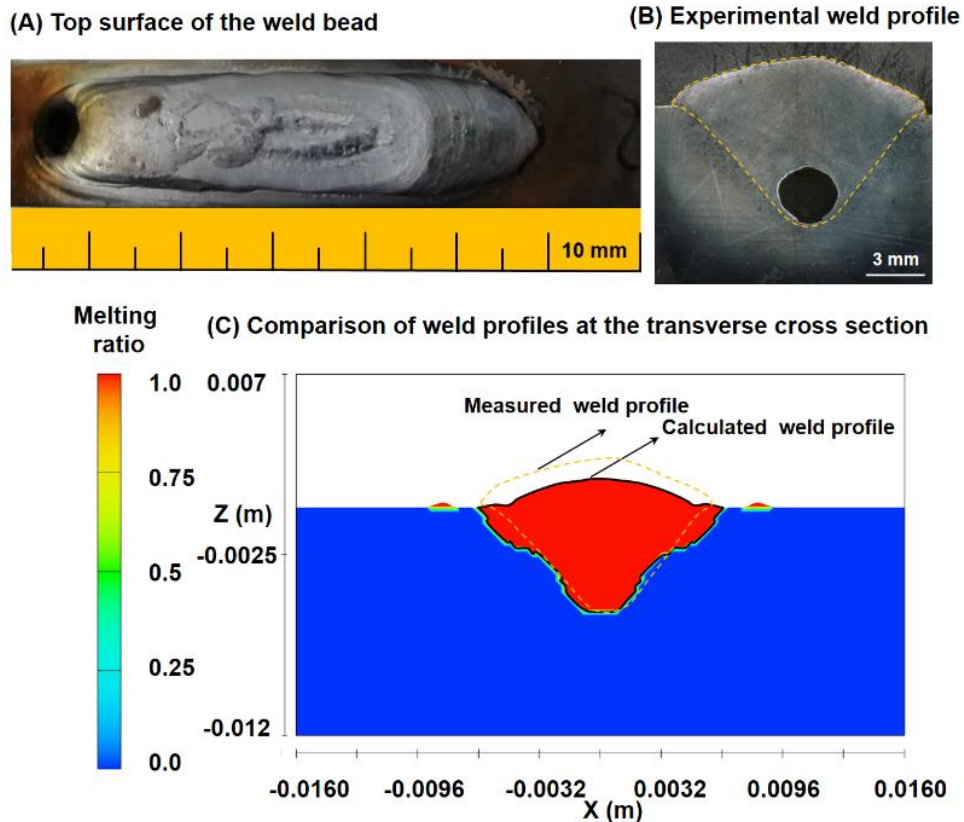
(A) Top surface of the weld bead; (B) Experimental weld profile at the transverse cross section; (C) Comparison of weld profiles at the transverse cross section
